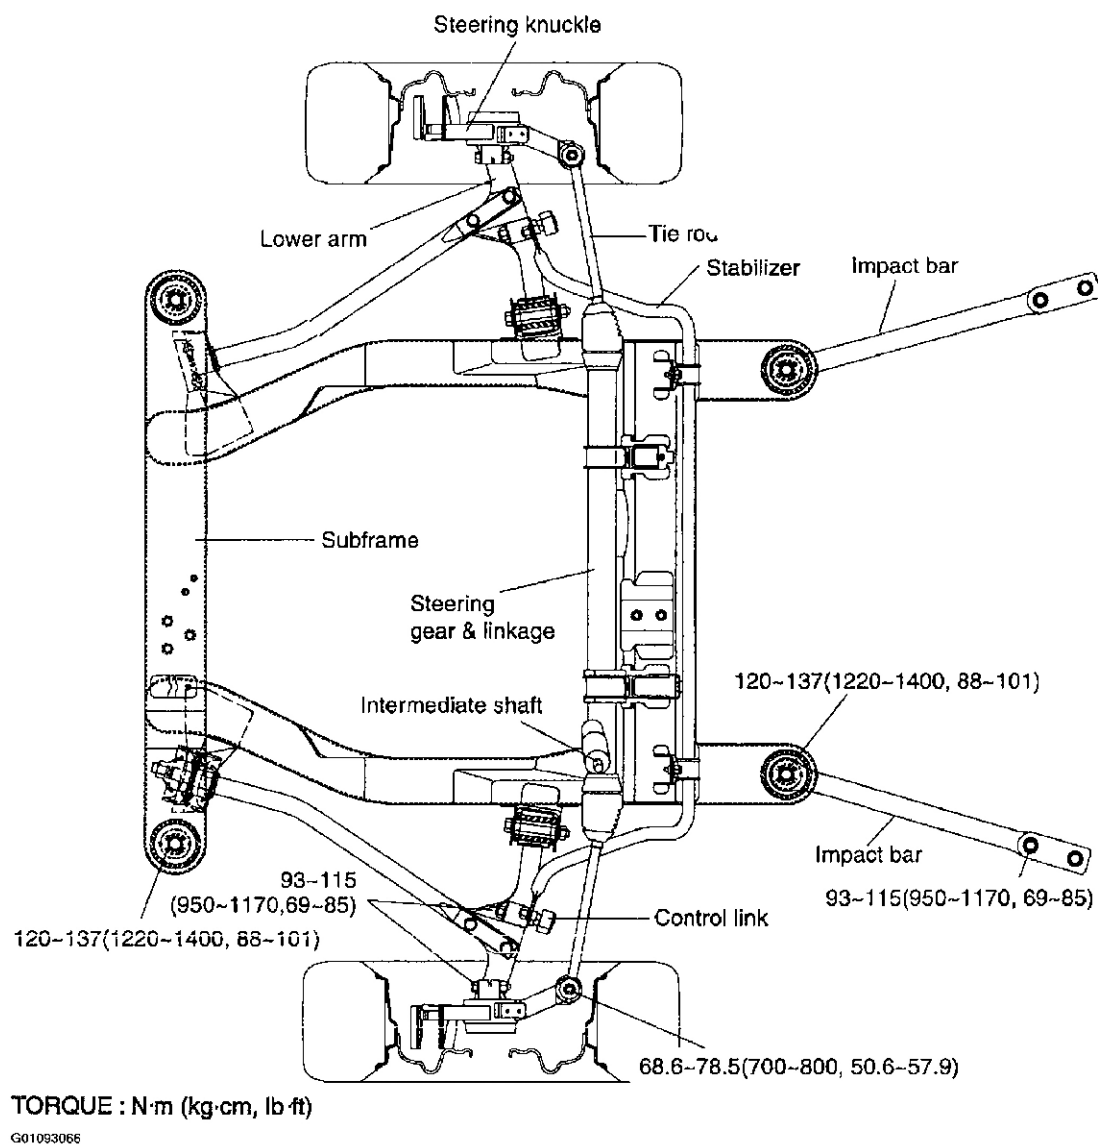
Installing Engine Mounting Bolts & Nuts (2 Of 2)
